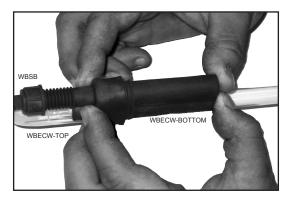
Position your hands and fingers as shown on the picture to insert the bottom part into the top part of the WBECW
